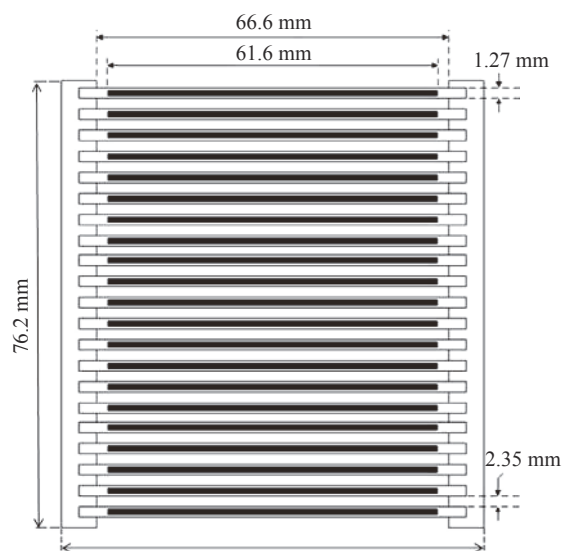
Sectional view of JRR-3M standard fuel assembly
